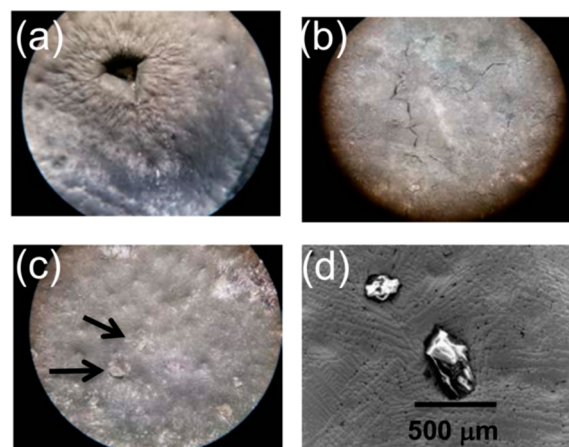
Optical-microscopy (30 \times) images revealing (a) blowhole in lead casting prepared from a sand mold using egg white as a binder, (b) cracks in lead casting prepared from a sand mold using no binder, and (c) sand grains (indicated by arrows) embedded in lead casting prepared from a sand mold using slippery elm bark boiled in ethanol as a binder. (d) Scanning electron micrograph (63 \times) of embedded sand grains in lead casting prepared from a sand mold using slippery elm bark boiled in ethanol as a binder.
